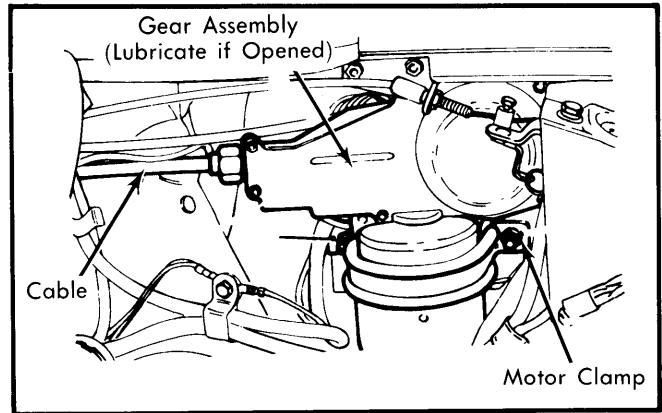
Removing Wiper Motor Assembly. Remove Battery, Cable and Motor Clamp.
